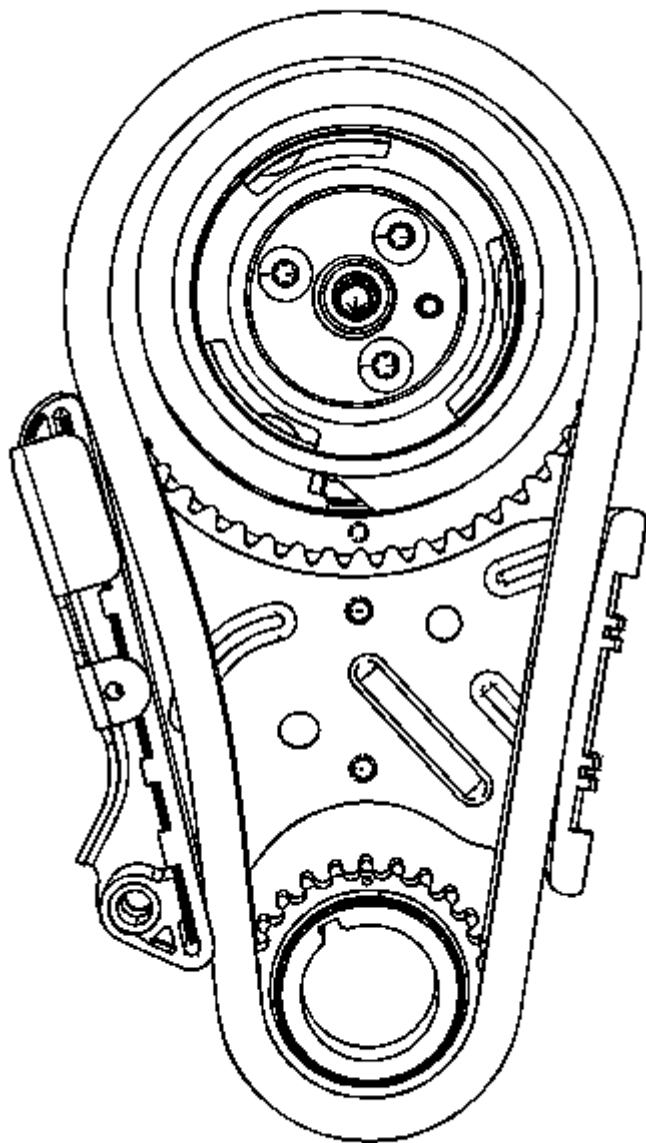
View Of Timing Chain, Sprockets & Tensioners
